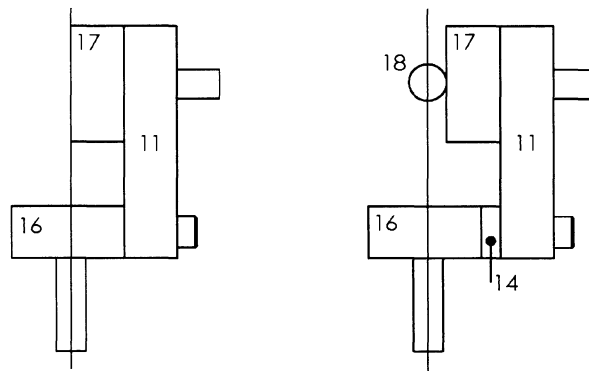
Side probe mount without spacer (left), with spacer (right)
